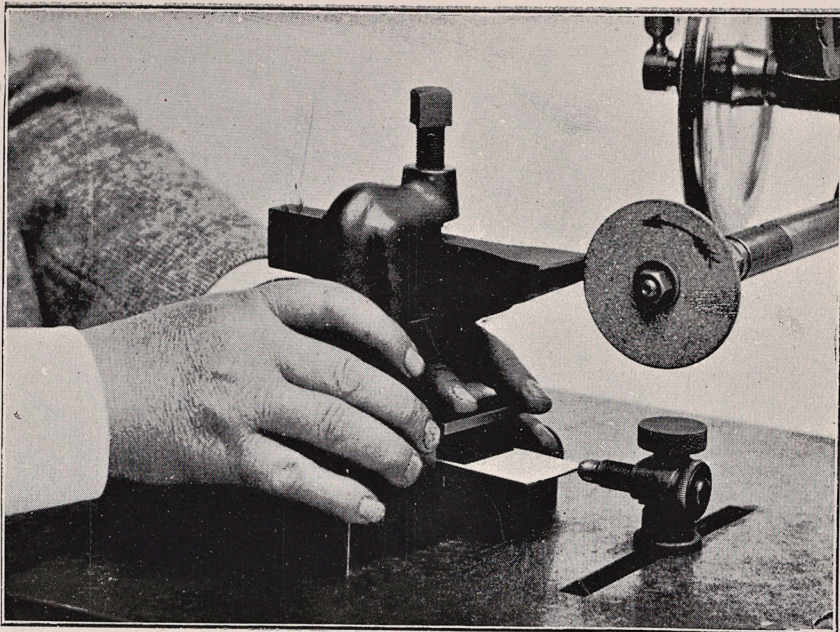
Grinding a Planing Tool for taking broad cuts.
